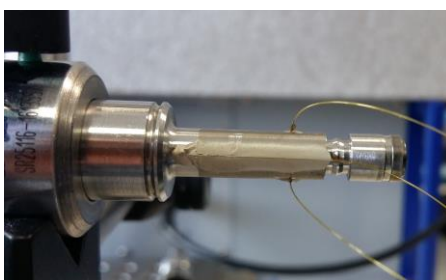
Assembling of two FBGs on the stem of a Solenoid Injector.
